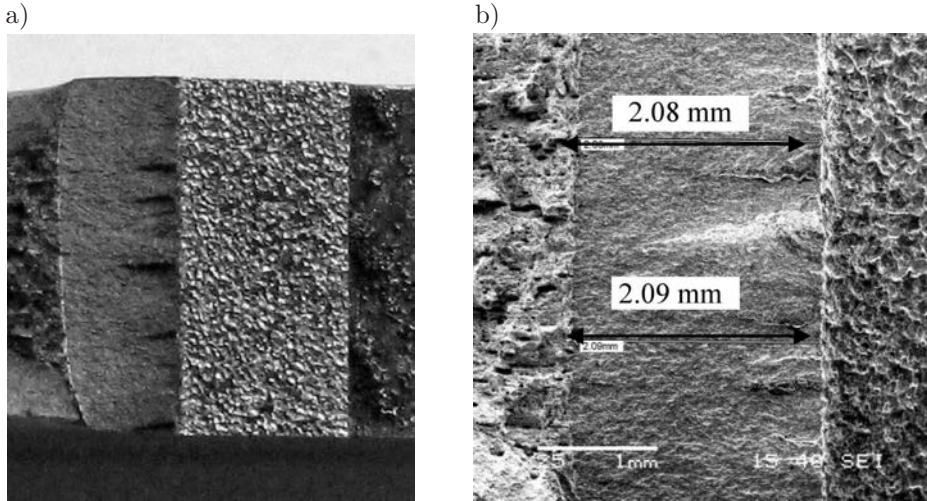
Fracture surface of the 40H steel after fracture toughness testing: a) fatigue zone in macro scale, b) fatigue zone in micro scale (magnification $25\times$).
